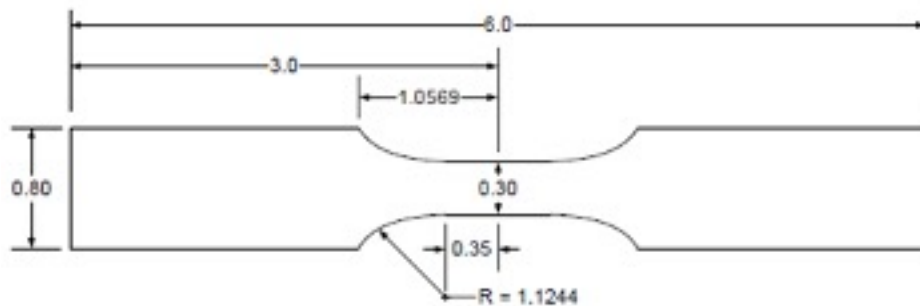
Dogbone-shaped test specimen. All dimensions in inches.
